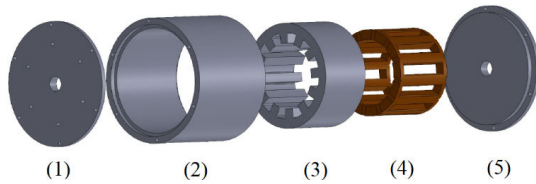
Exploded view of the analyzed SRM (1) front endcap (2) housing (3) stator (4) winding (5) rear endcap.
